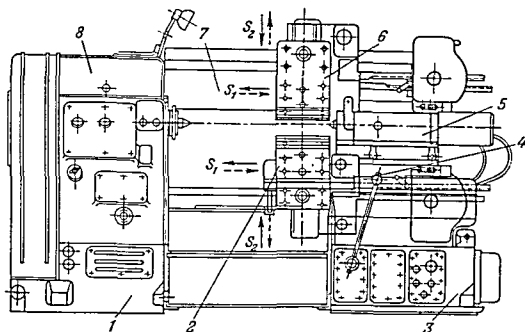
Hydraulic multiple-tool semiautomatic centre-type lathe
